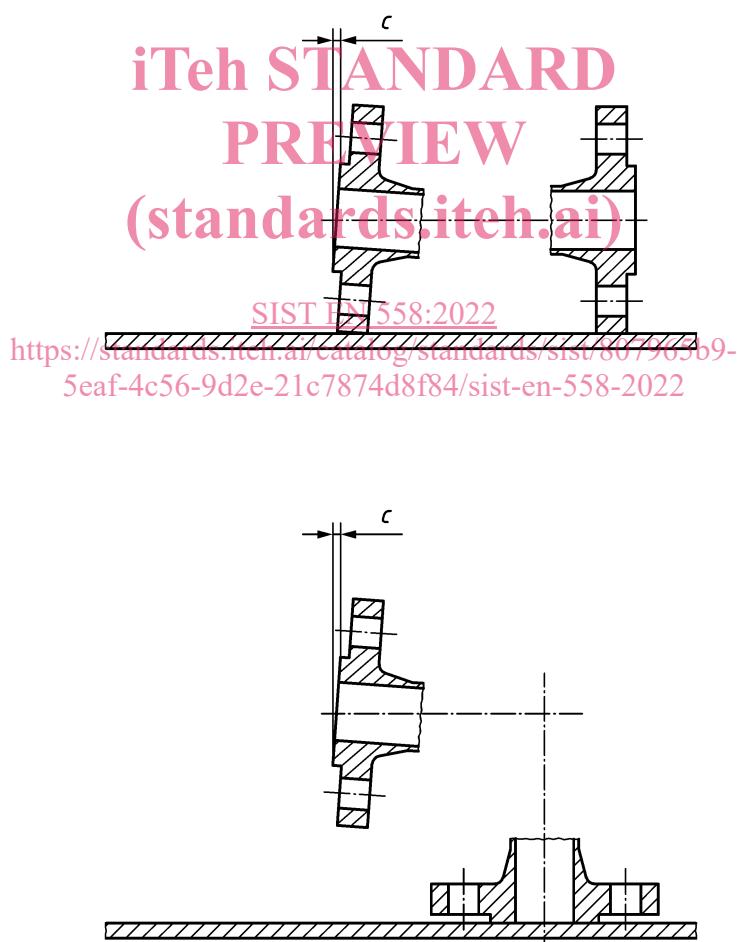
Tolerances on parallelism and perpendicularity
